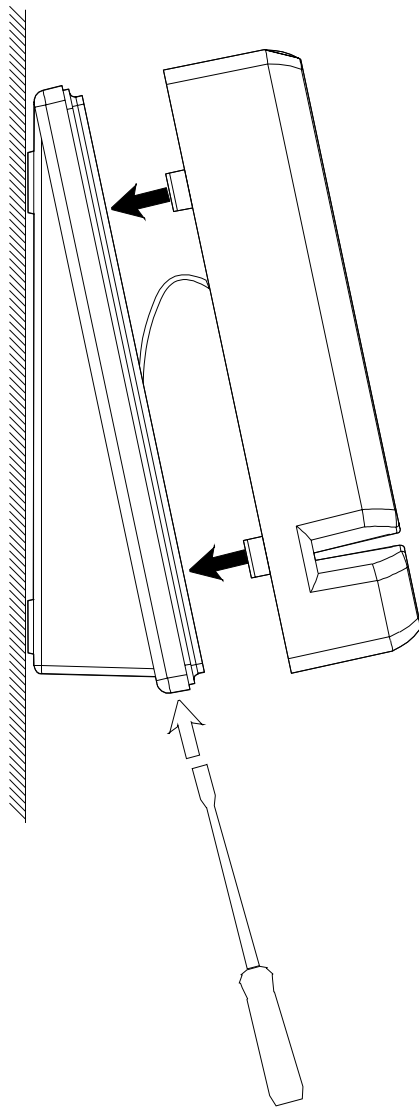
Closing the Terminal (Wall-Mounted Assembly)
